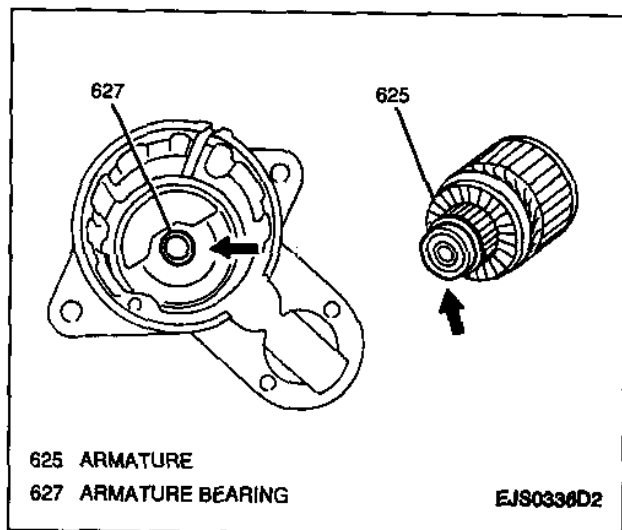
Inspecting Armature Bushing and Bearing
